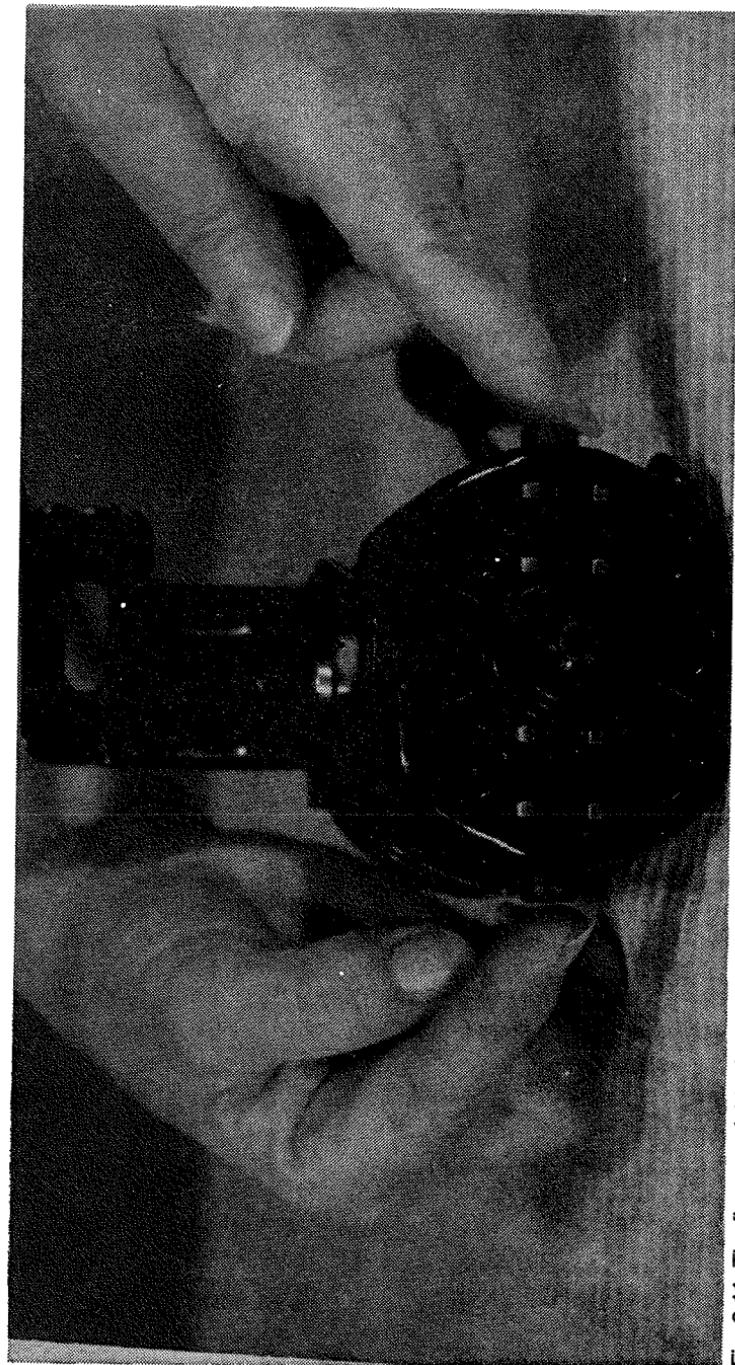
The fingers point to the caps that cover the brushes on this motor from an old Bel-Air straight-stitch sewing machine.
